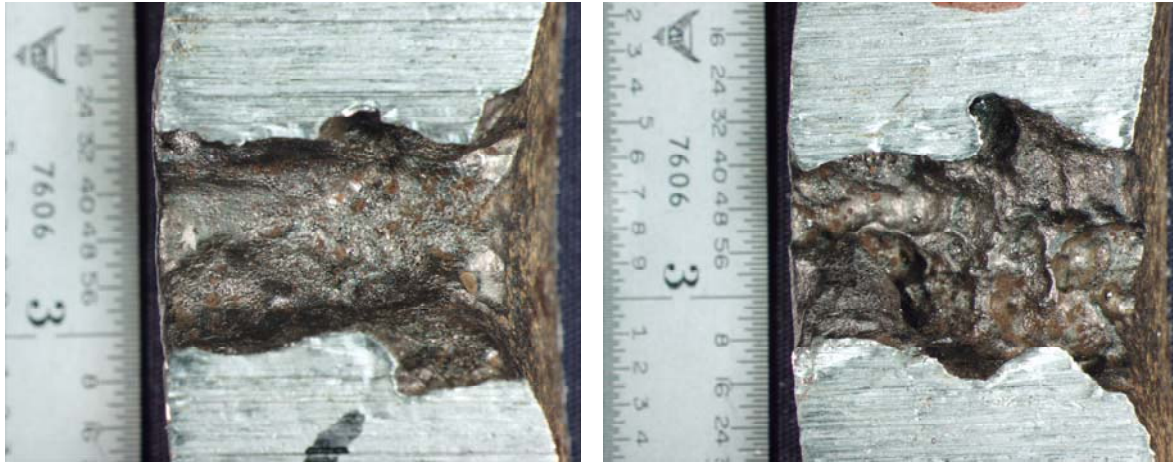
Matching halves of the cross-sectional view of the sixth witness plate.
